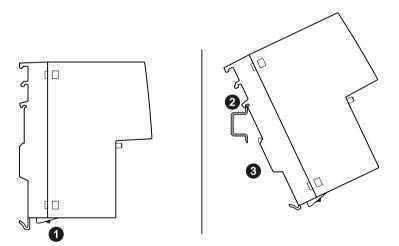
DIN rail mounting with securing bar in the wall mounting position.
